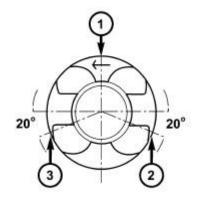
Piston Ring Gap Location Courtesy of CHRYSLER LLC
